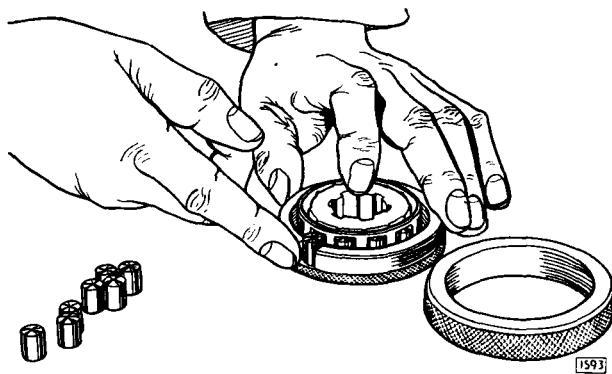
Assembly of the uni-directional clutch (Tool No. L.178).
